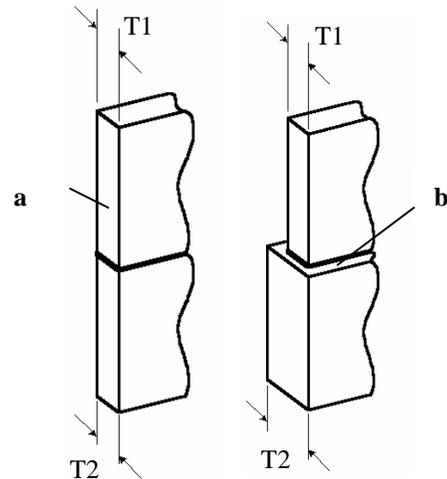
Principle of butt-joint geometry (a – similar, and b - dissimilar thickness welds)
